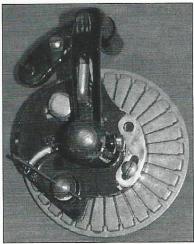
Ribber Bed, Sponge Bar and Racking Handle for Holding Position Machine
